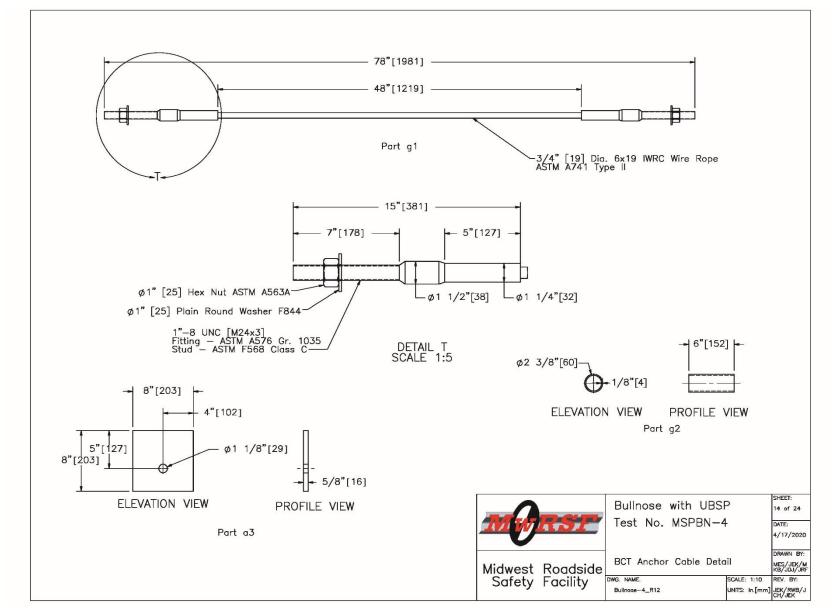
BCT Anchor Cable Detail, Test No. MSPBN-4
